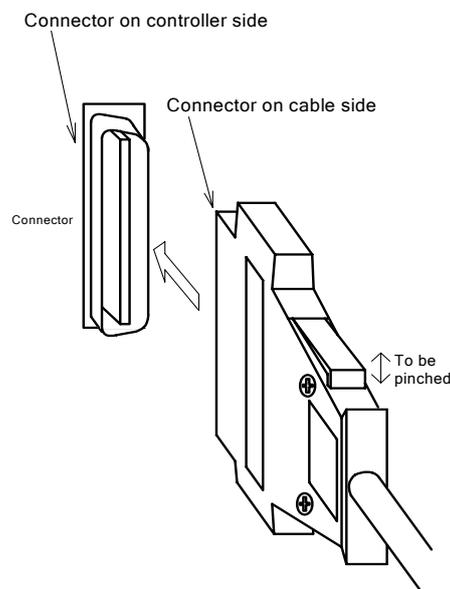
Attaching and detaching external I/O signal cable (INPUT/OUTPUT)
